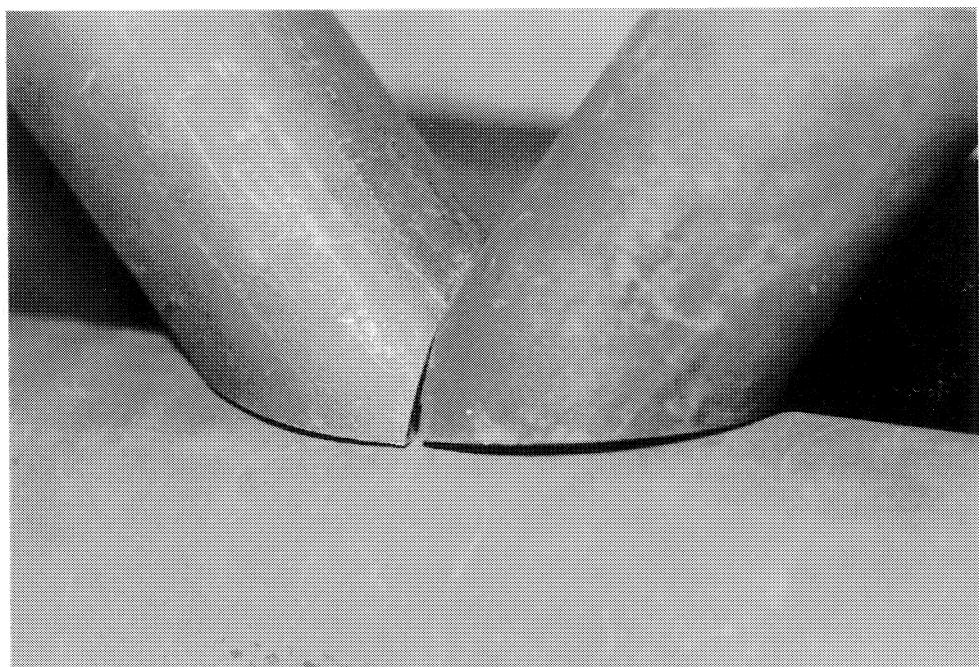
Node manufactured by plane cuts by sawing before welding (a plate is to be inserted between bracing ends for convenient welding)
